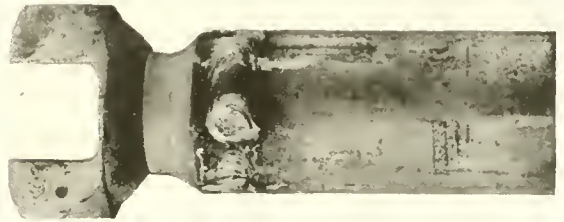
Flexible shaft for automobile, arc welded.
